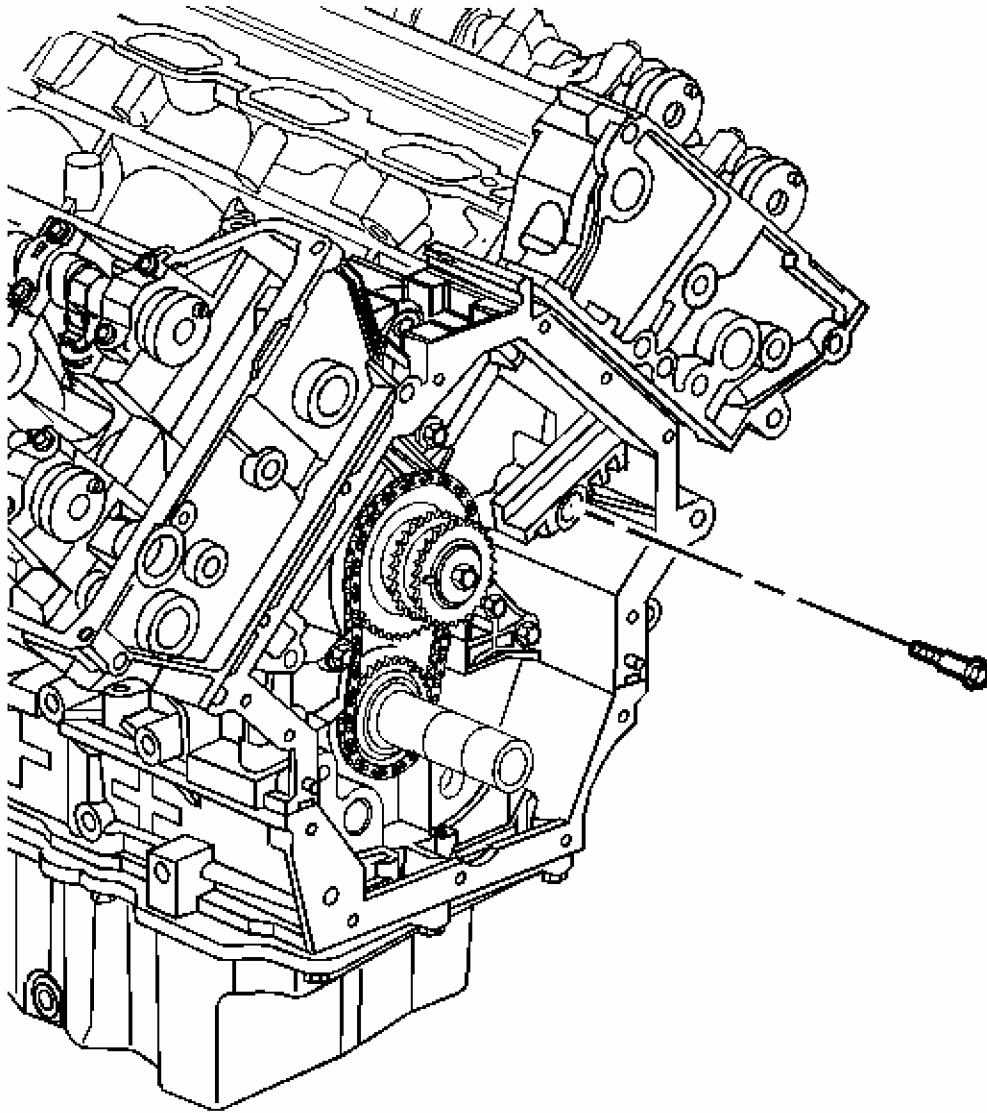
Identifying Lower Left Secondary Camshaft Drive Chain Guide Bolt
